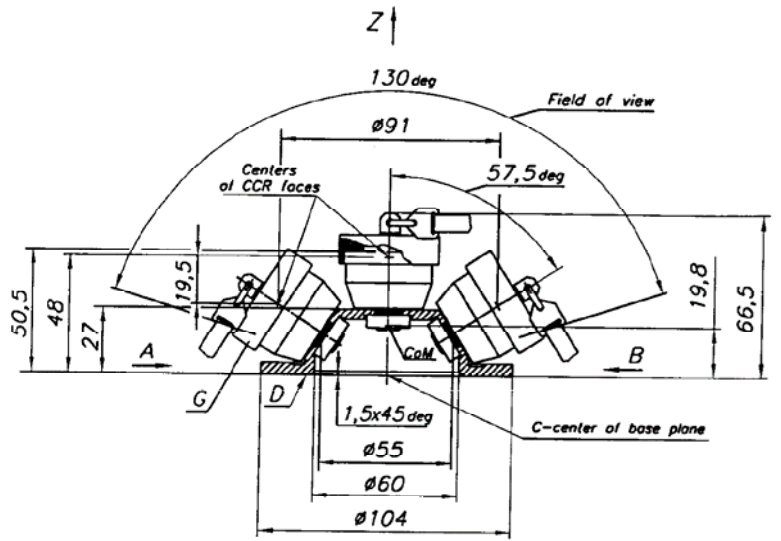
Design drawing of PROBA-2 Laser Retro Reflector Array (side view, [3])
